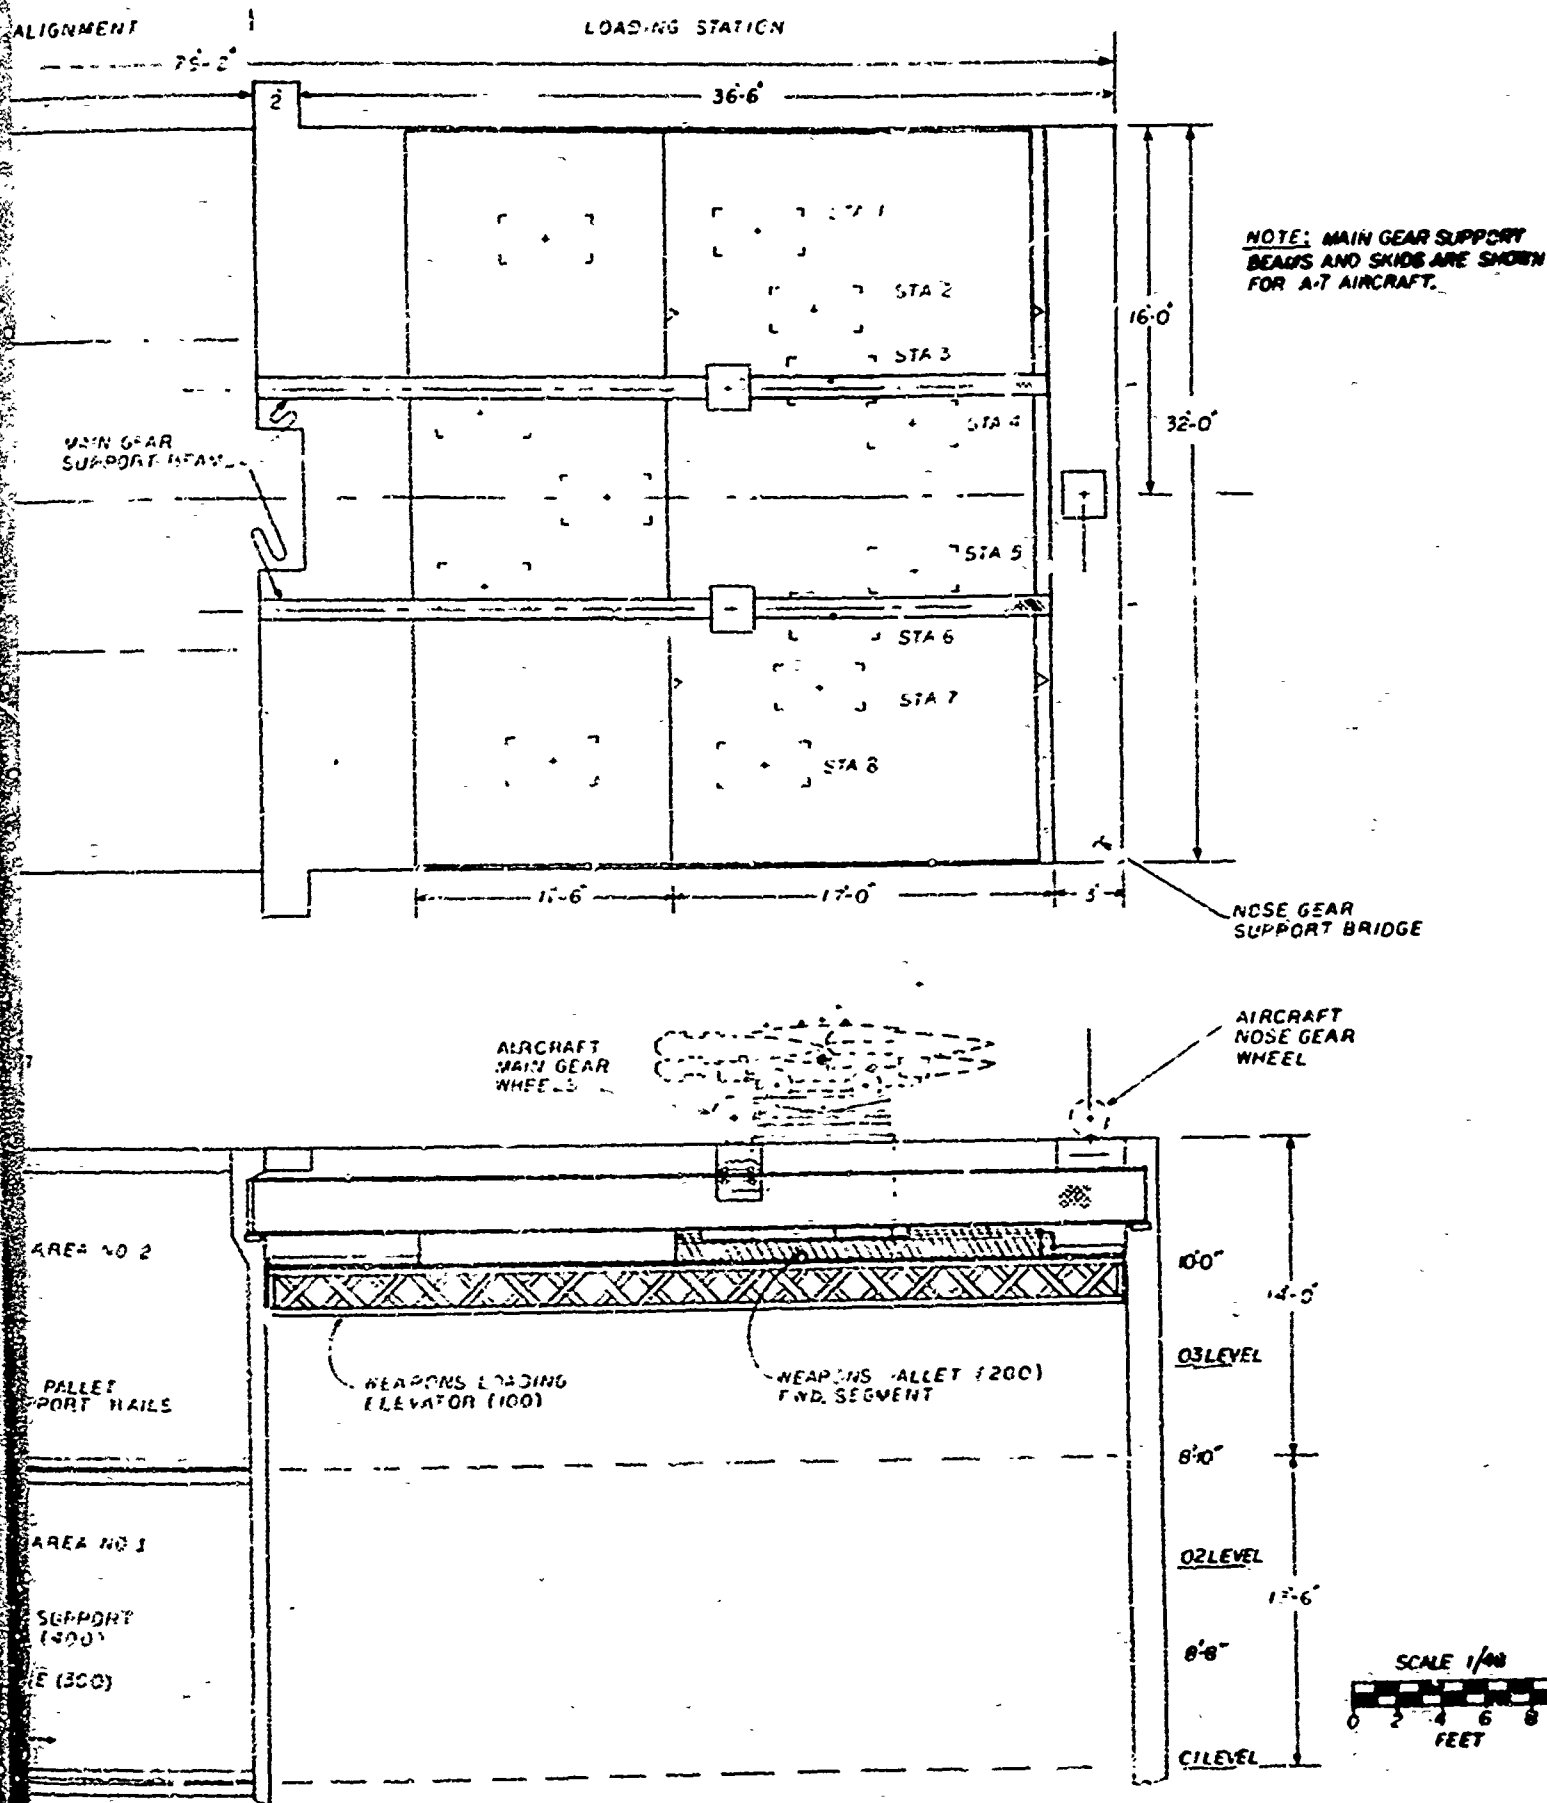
, UNIT LOAD HANDLING STATION - AUTOMATED CONCEPT
